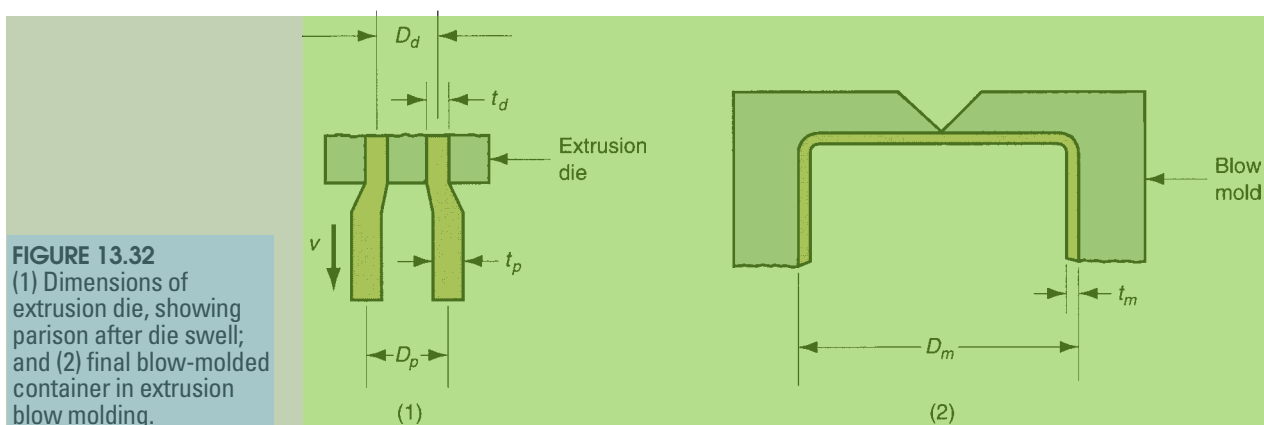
(1) Dimensions of extrusion die, showing parison after die swell; and (2) final blow-molded container in extrusion blow molding.
